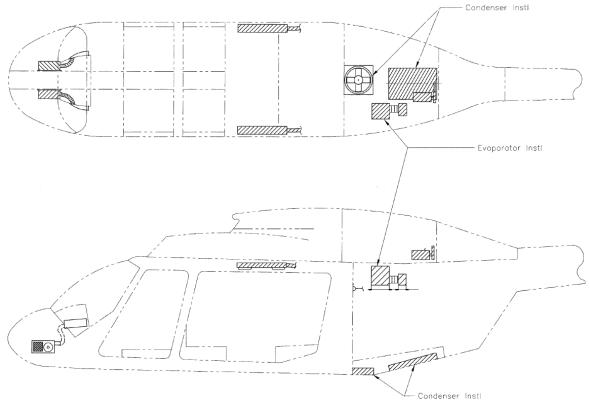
Aft Evaporator/Condenser Blower Assembly Locations
